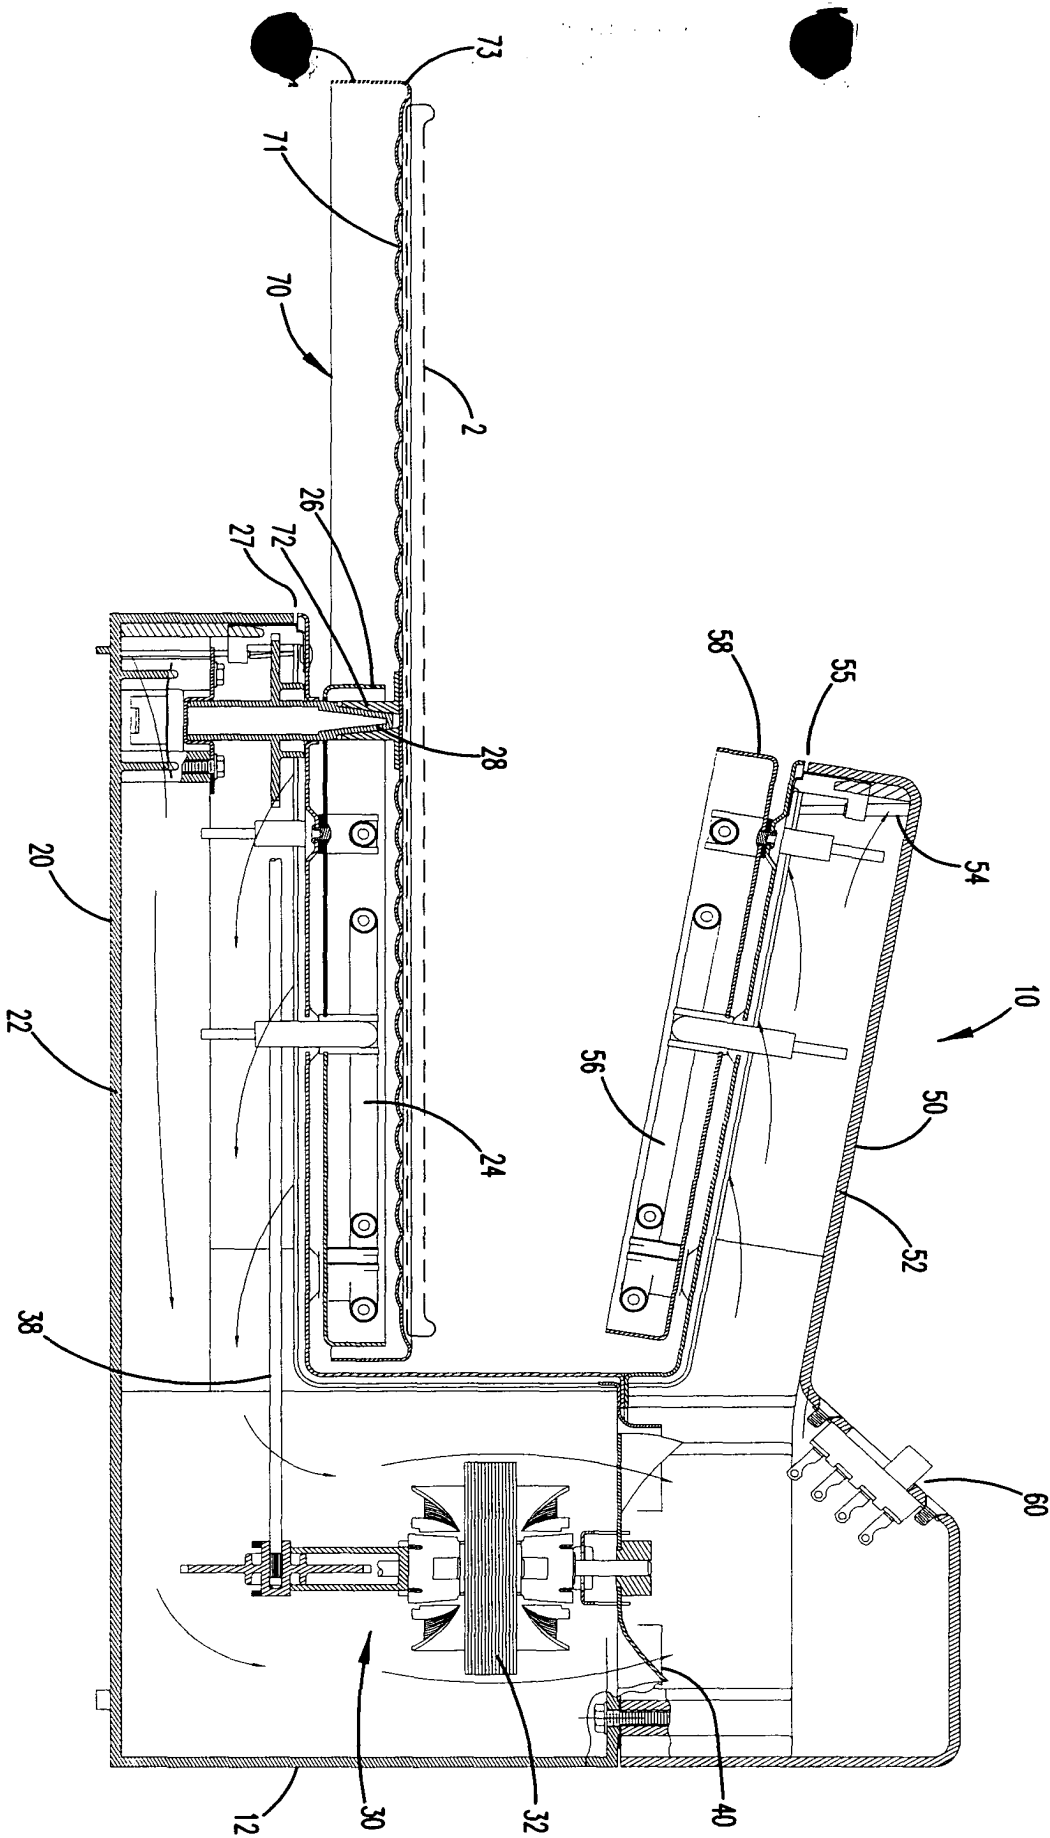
is a cross-sectional view of a mechanical assembly, showing a housing 10, a carriage 50, a drum 32, and various rollers and guides (20, 22, 24, 26, 27, 28, 30, 38, 40, 52, 54, 55, 56, 58, 60, 70, 71, 72, 73).
